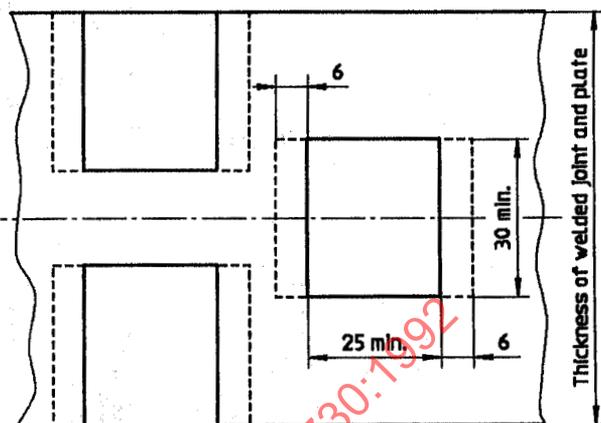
Selection of reduced section tensile test specimens in a thick plate
